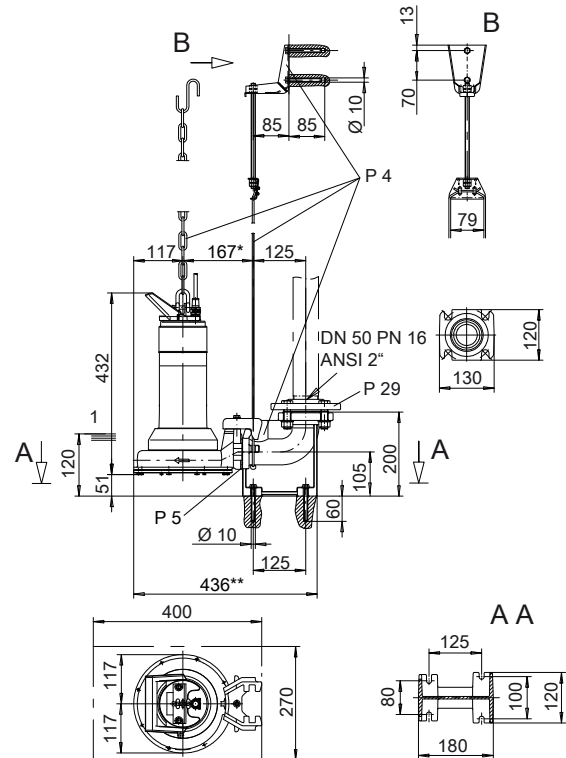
Outline drawing Ama-Drainer 522 ND/11 with guide wire
